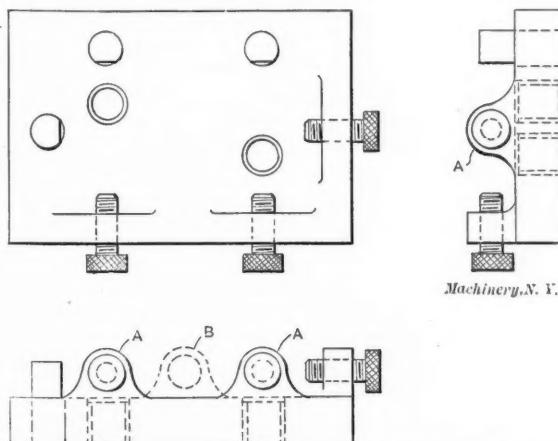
Second Improvement: Locating Screws Holding Work in Place.
